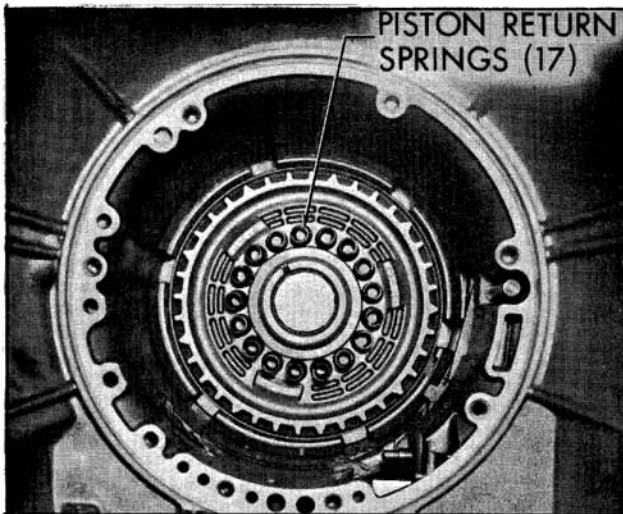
Removing Reverse Clutch Piston Return Springs
